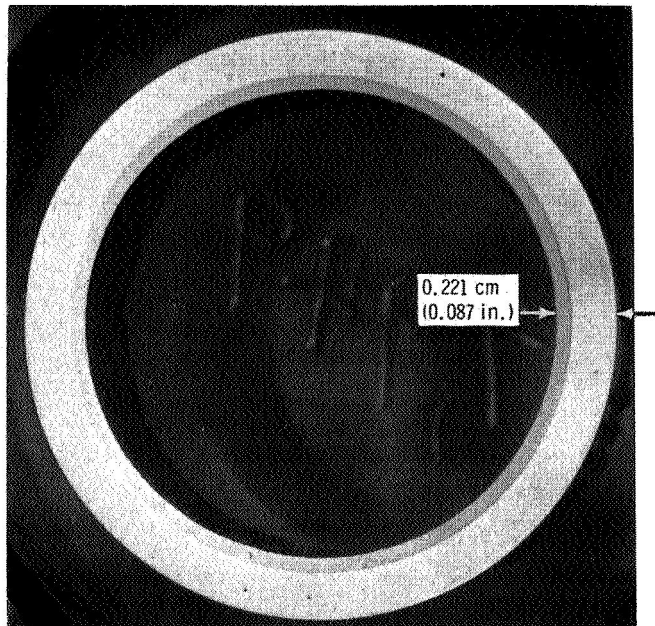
Transverse section of Tantalum/316 stainless steel tubing produced by a Mandrel extrusion method (ref. 24). Unetched.
